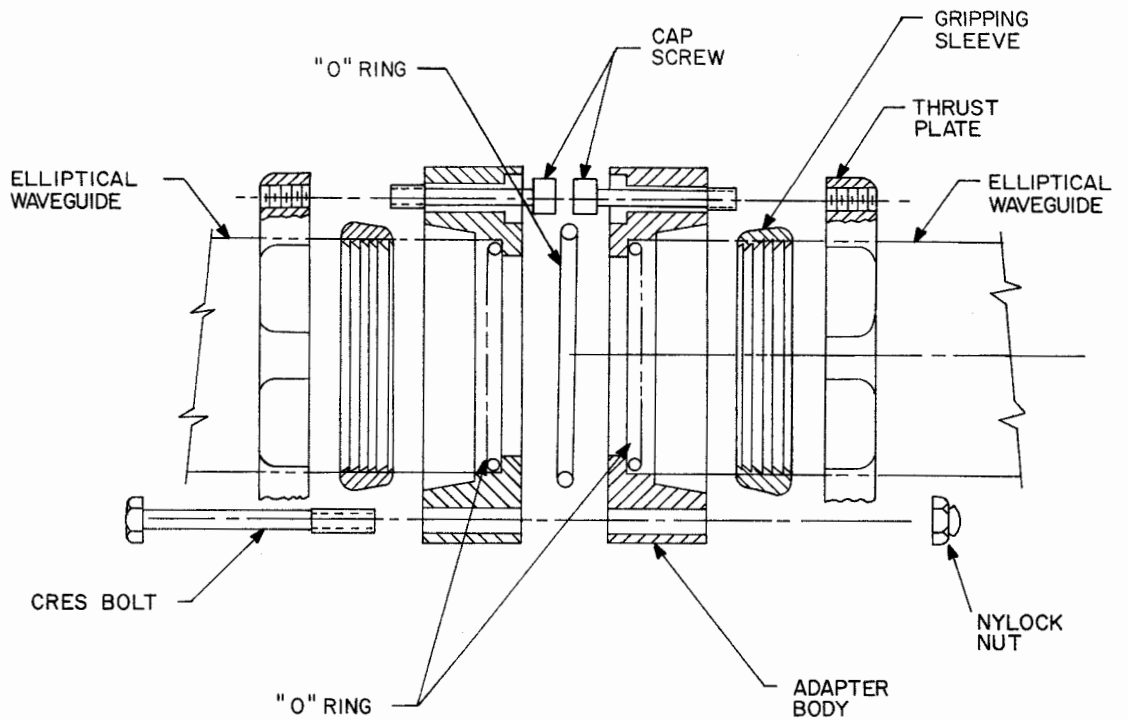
Coupling Assembly Identification for Large Elliptical Waveguide
